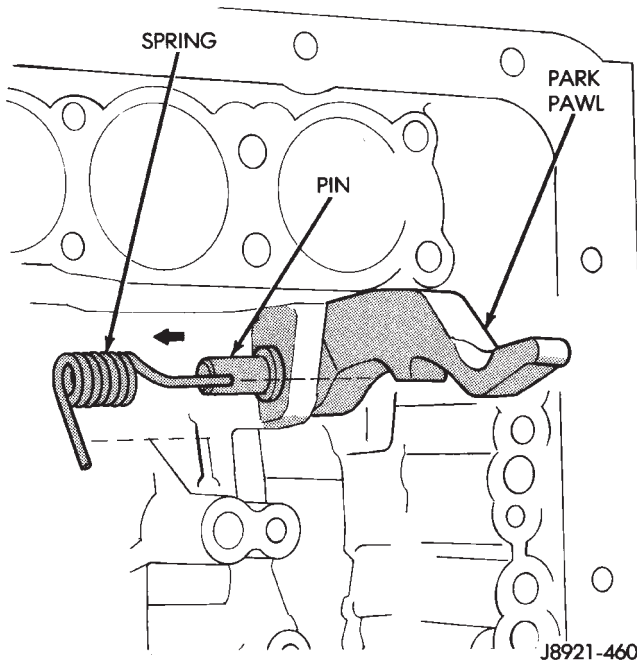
Removing/Installing Park Pawl, Pin And Spring
